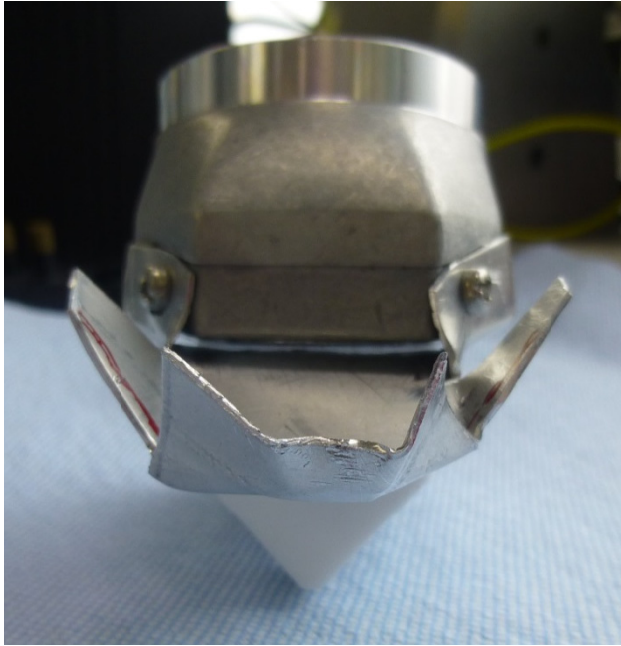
Extrusion welding gun nozzle with preheat deflector plate attached.
